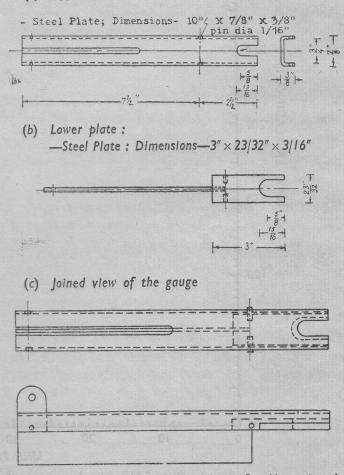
Design Drawings of the Gauge for Measuring the Set Pressure of a Relief Valve (Drawings not to the scale).
